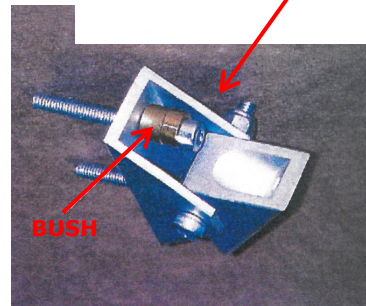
(Left) This Picture shows the centre hinge assembly from a P.300. Note the bushings (arrowed) which act as a primary control stop.
